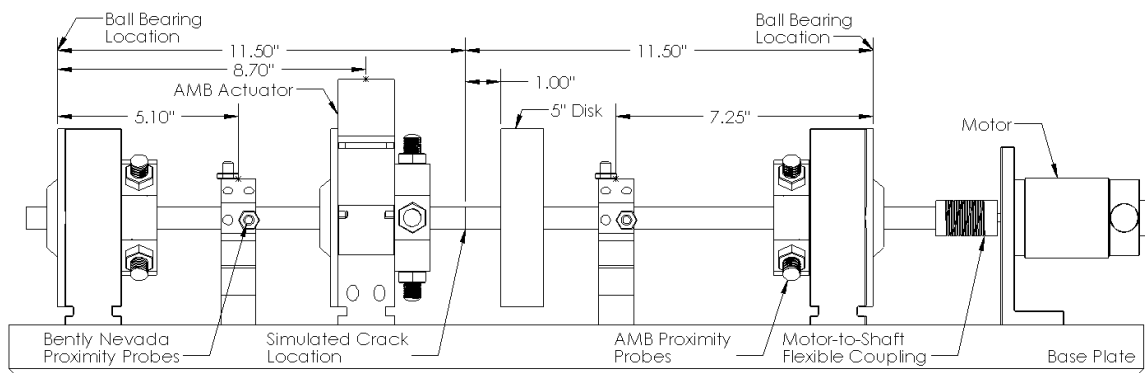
CAD drawing of Cleveland State's rotor test rig.
